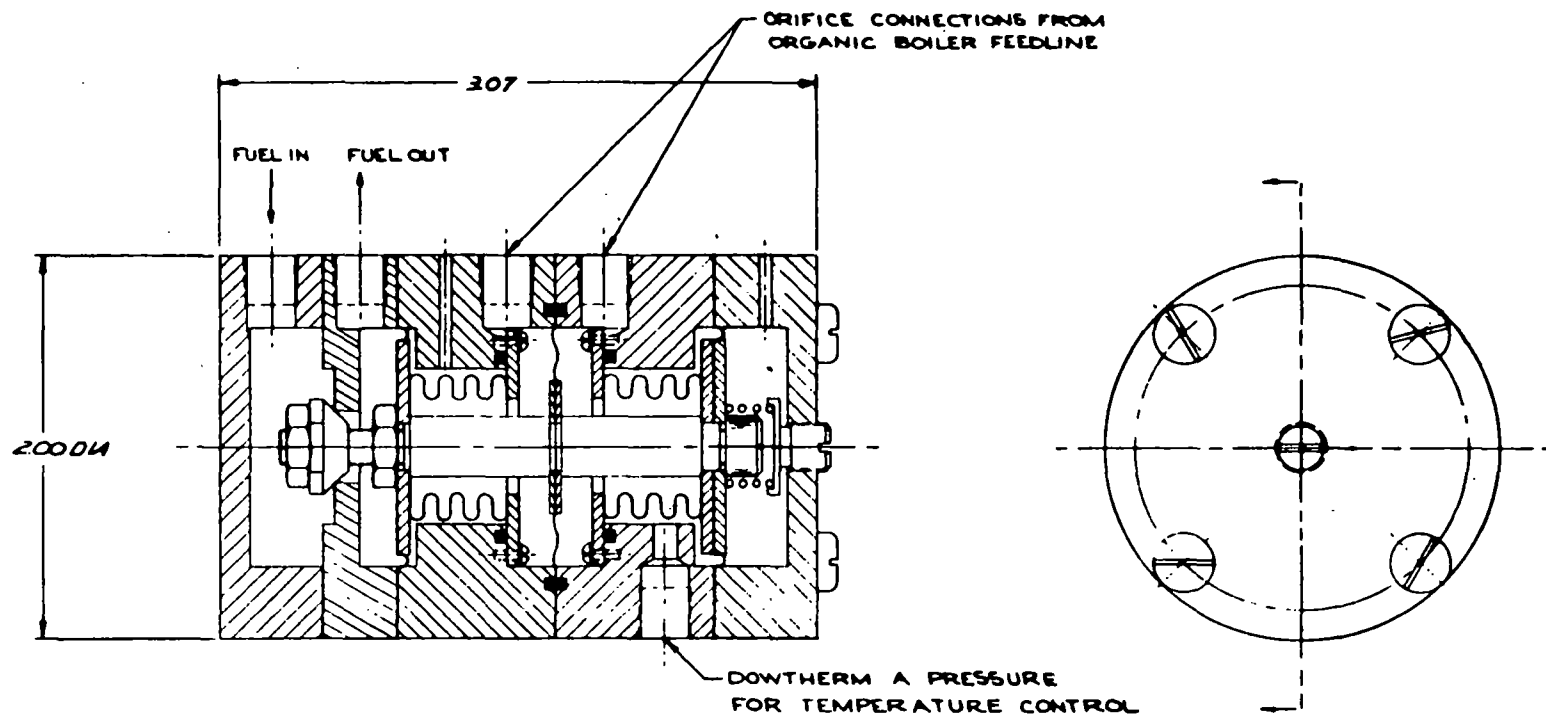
Burner Modulating Fuel Control Valve and Actuator.
